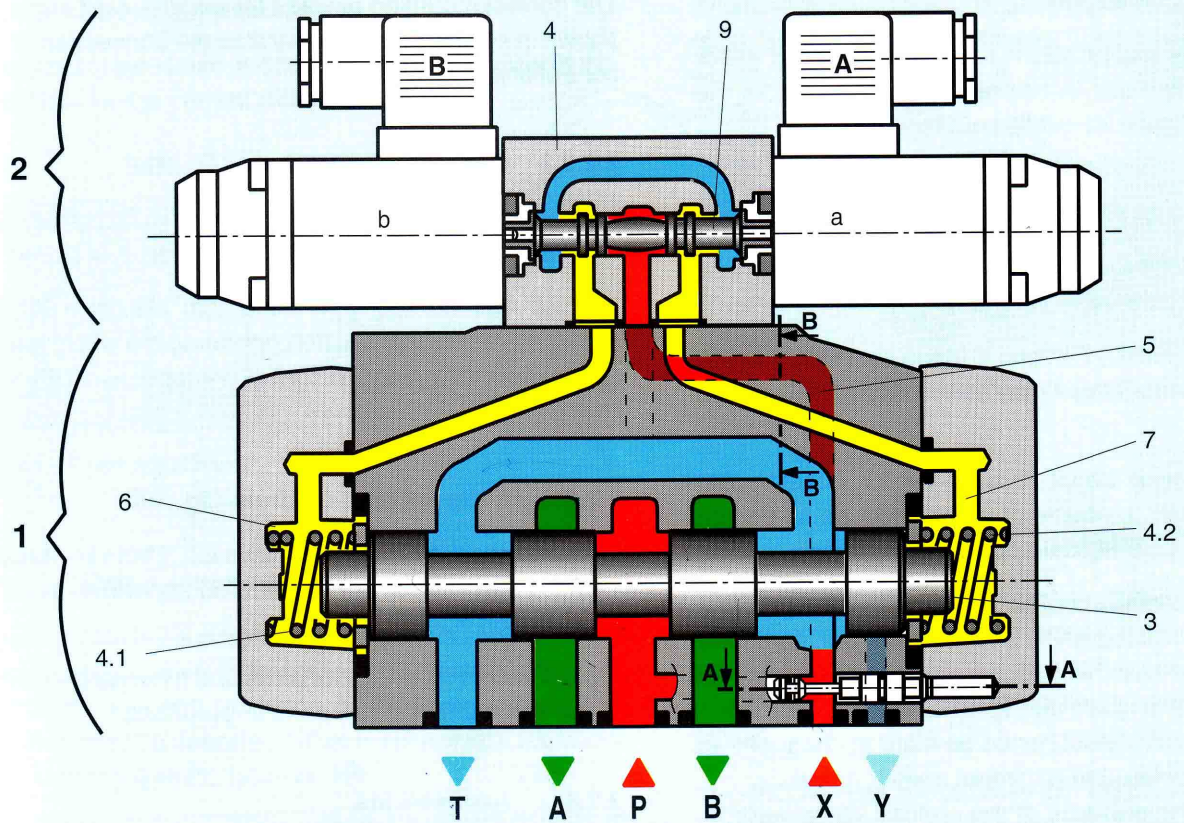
Electro-hydraulically operated directional spool valve, spring centred, for sandwich plate
